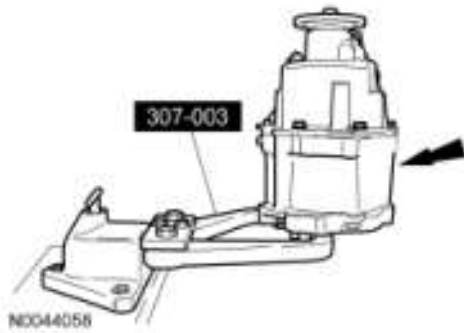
Attaching Transfer Case To Transmission Holding Fixture
